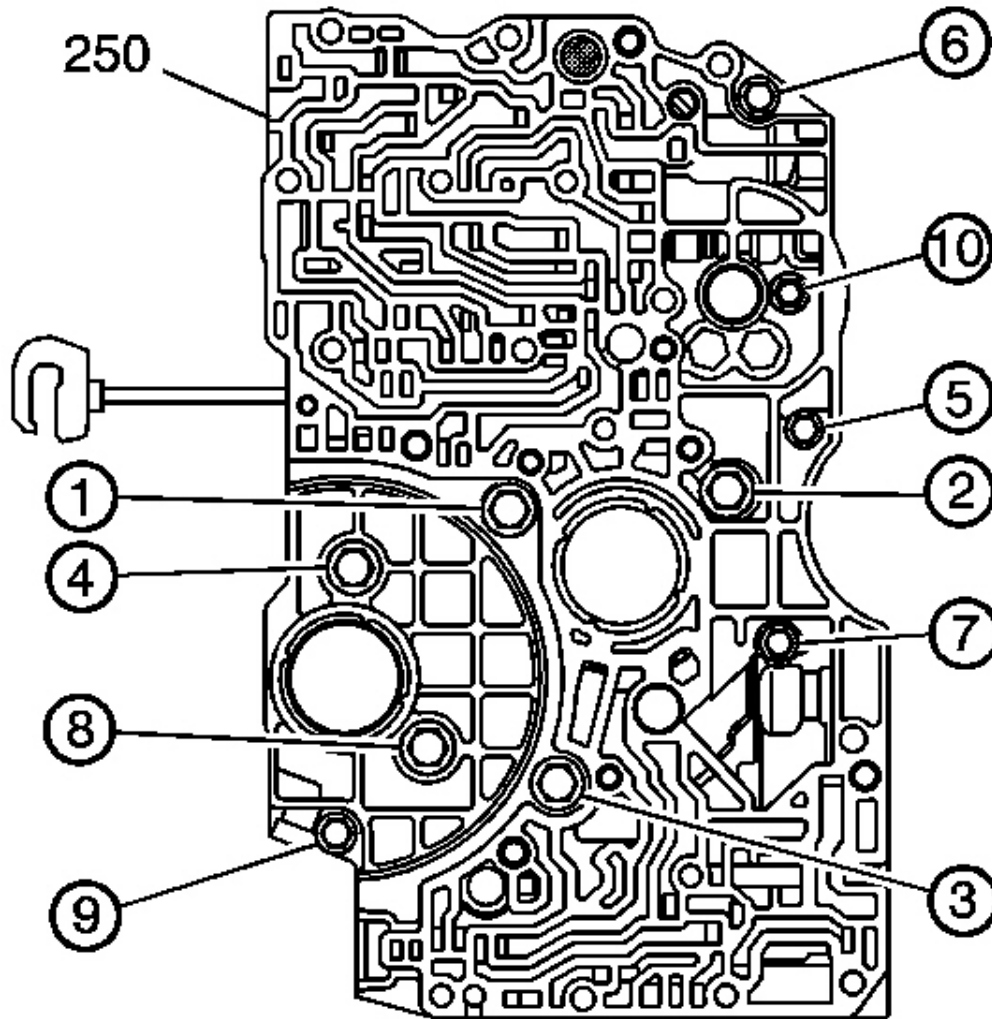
Tightening The Control Valve Body Assembly Bolts In Sequence
